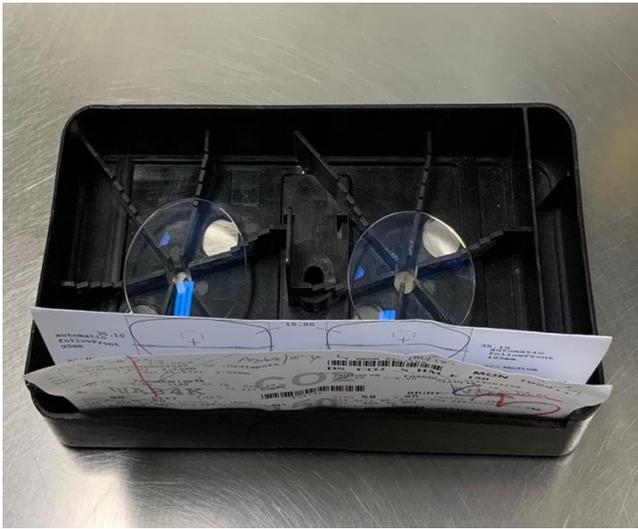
The appearance of the workpiece that the workpiece is inserted into the tray.
